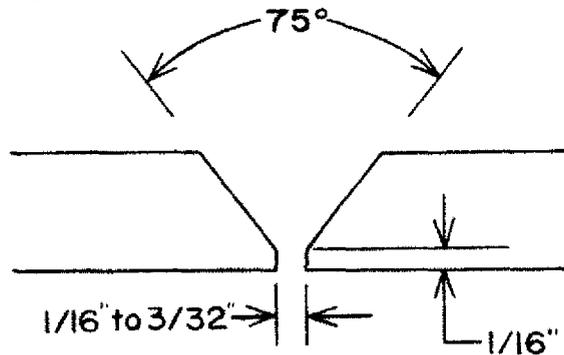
Weld joint specification for GTAW welding of the root bead.
